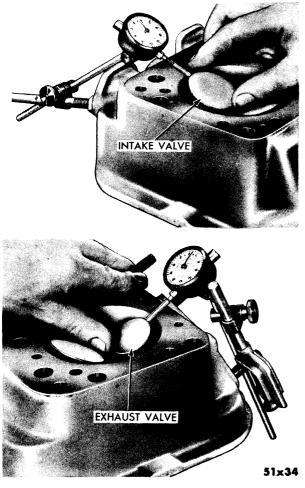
Checking Valve Guide Clearance (Tool C-3339)
